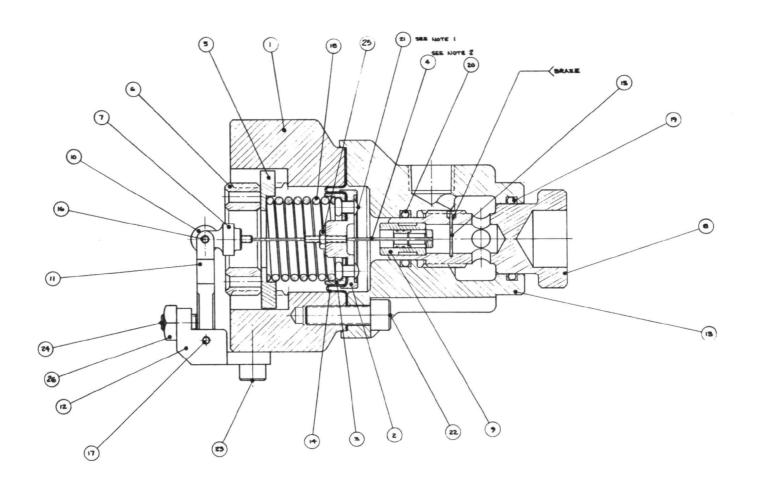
56 Layout Drawing of Combustion Air Servo-Control.
